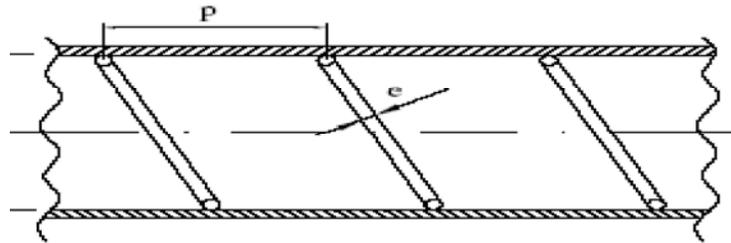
View of the tubes and wire coils inserts and their dimensions
